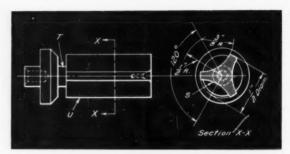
Fuel pump valve machined on turret lathe equipped with special milling head for producing flutes (5)
